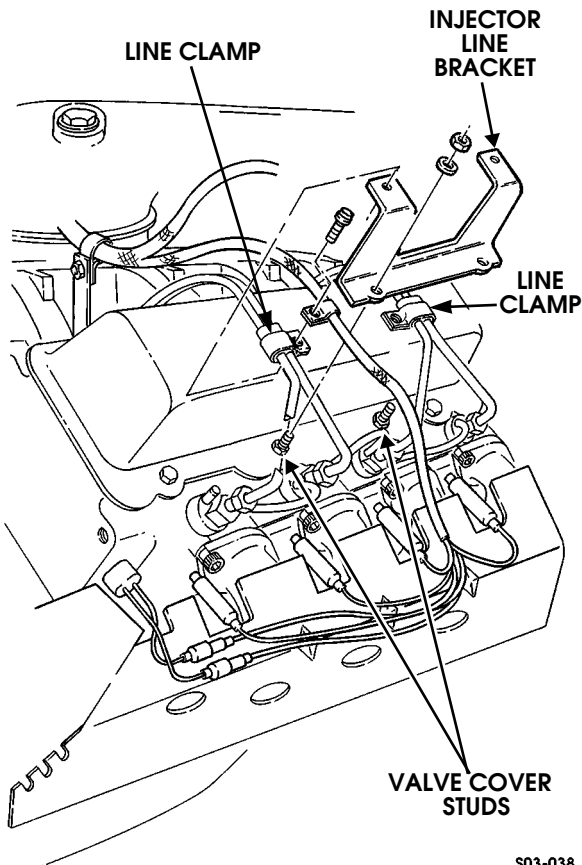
Injection Line Bracket Removal/Installation (NA Diesel Shown)
